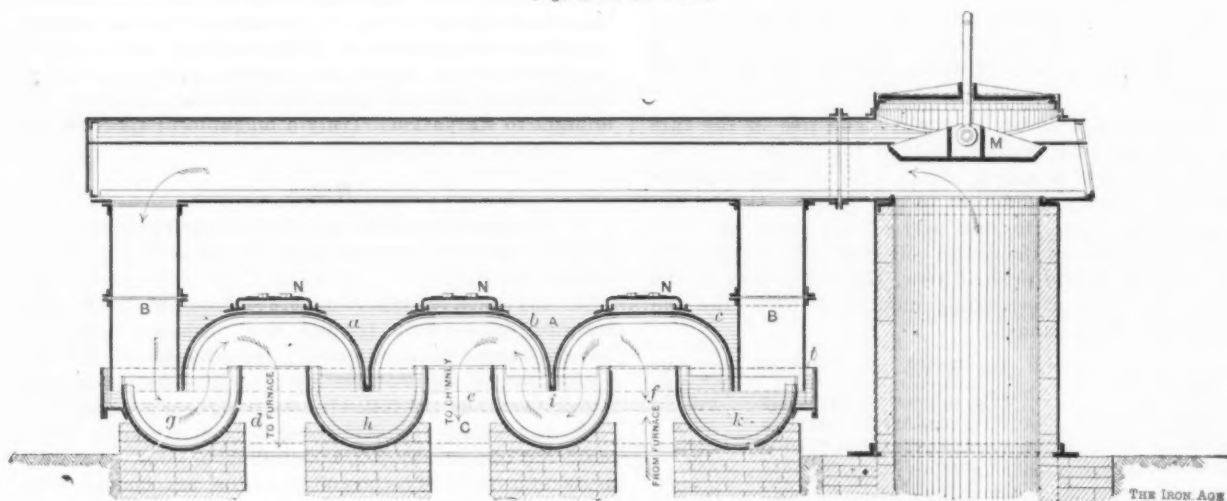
Longitudinal Section.—Wrought Iron Construction.
